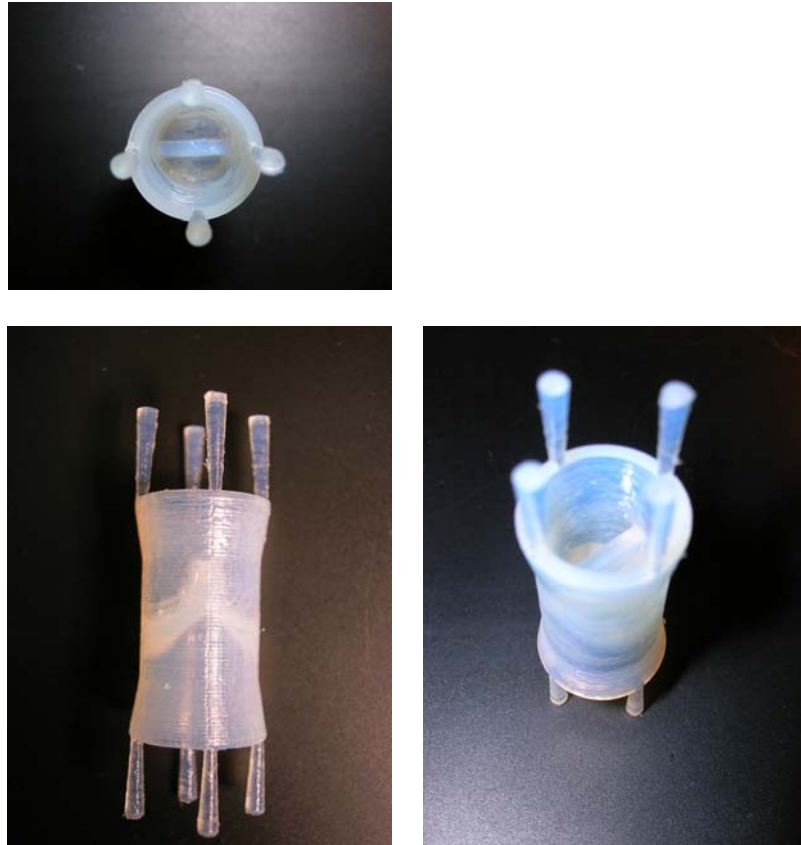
Rapid-prototyped valve die with extrusions for forming injection molding gates
